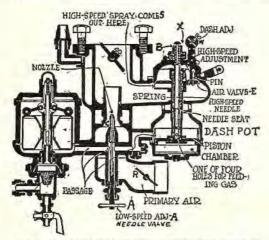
Sectional view of Stromberg model "H" carburetor.
